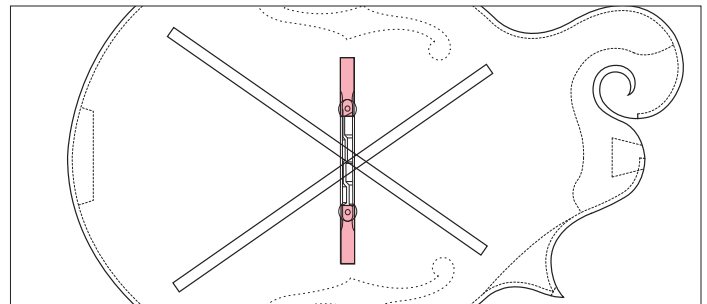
When an X-brace pattern is used on an arch top instrument, the bridge feet (red) do not rest over or on the braces.
